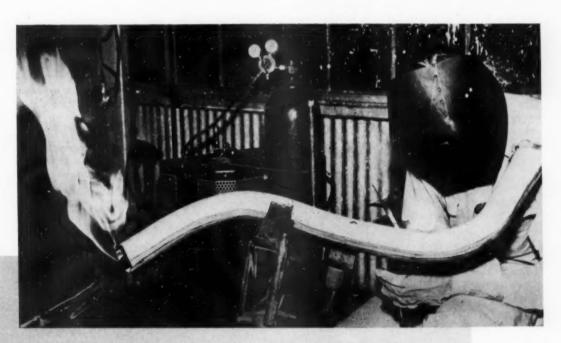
Atomic-hydrogen welding of a long stainless steel tubular part. Introduction of illuminating gas into the tube maintains a reducing atmosphere on the underside of the weld. Flames from the burning gas are shown at the left.
